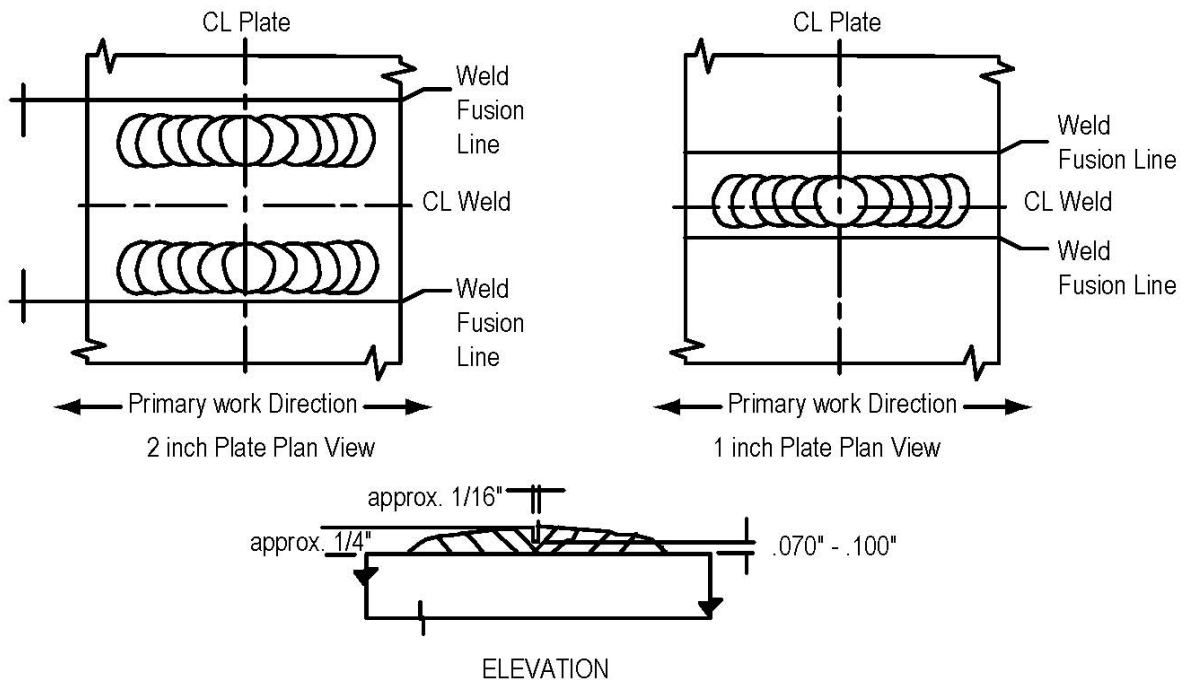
Crack Starter Bead Configuration – Base Metal Evaluation Incorporating a Weld Joint.
